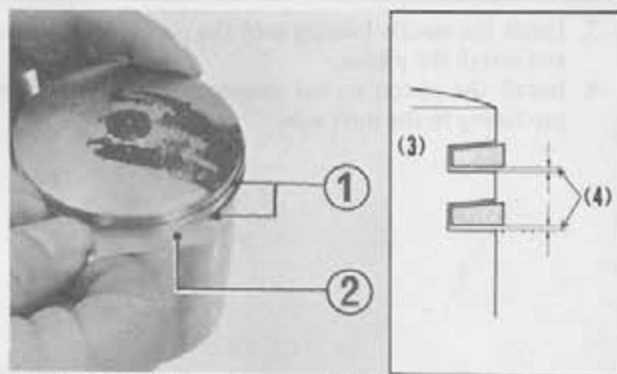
(1) Piston ring (2) Feeler gauge (3) Piston (4) Clearance
